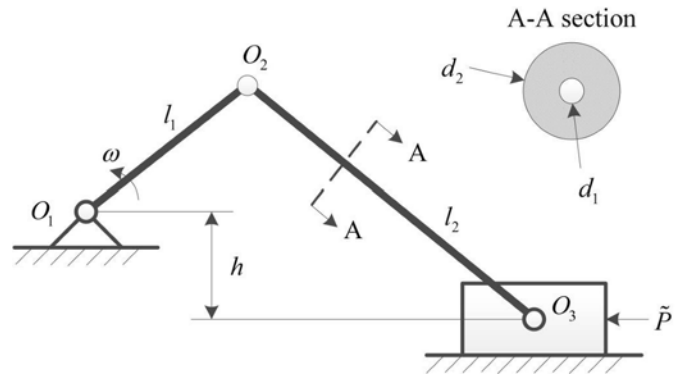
The kinematic scheme of mechanism of an internal combustion engine
